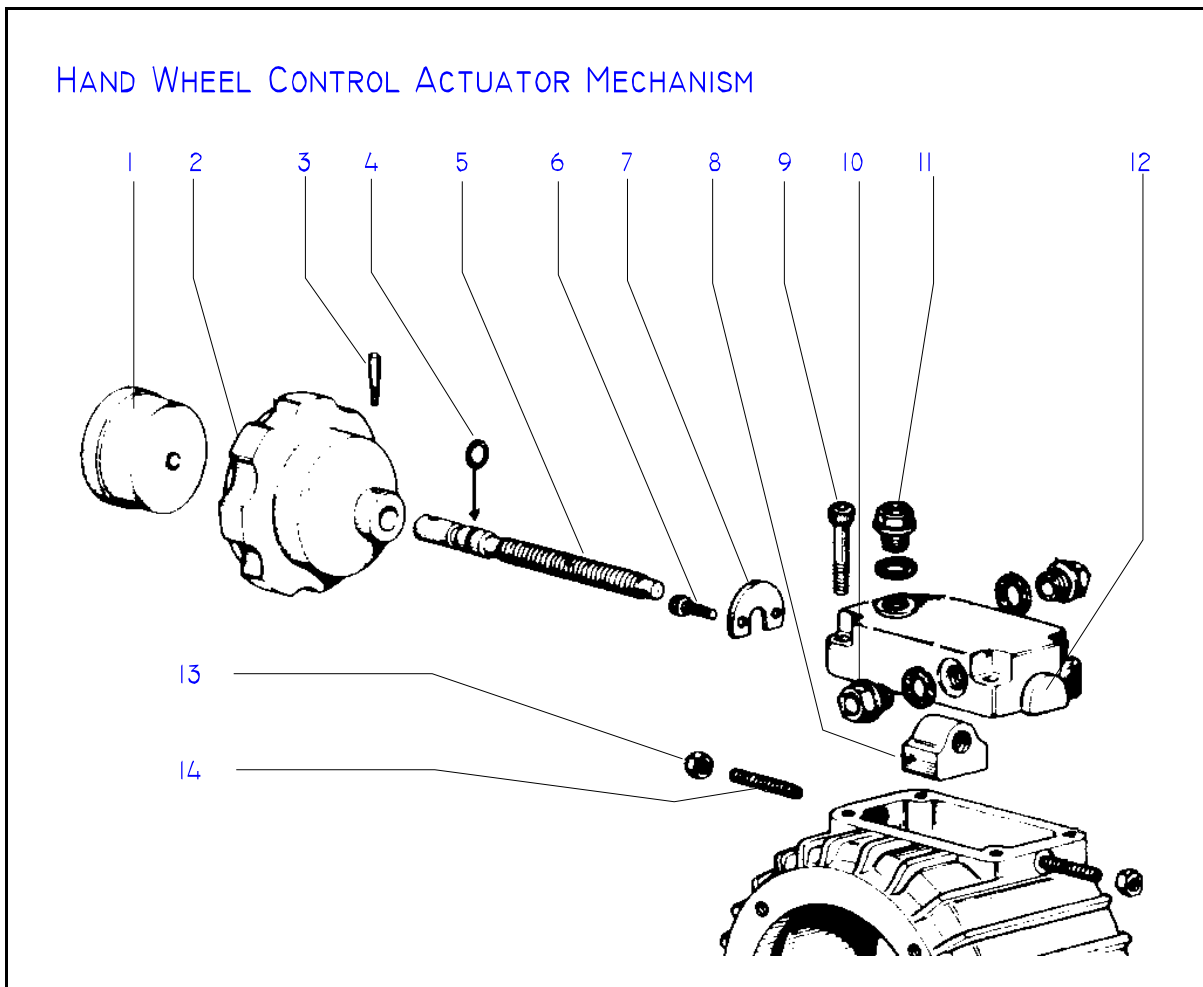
Discharge Variator Handwheel Control (Exploded View)
